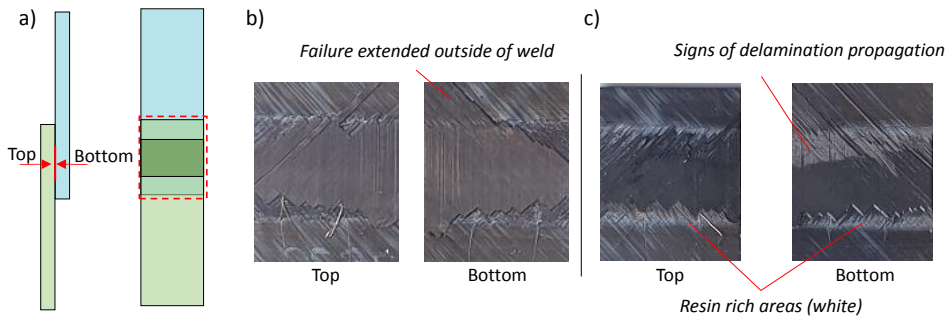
Failure modes of welded single lap shear specimens: a) Specimen geometry and views; b) Specimen 3; c) Specimen 8.
